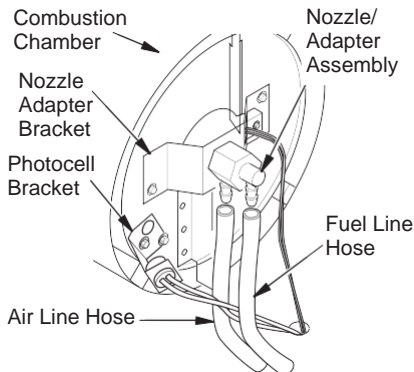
Removing Air and Fuel Line Hoses (125T and 170T Models Only)
